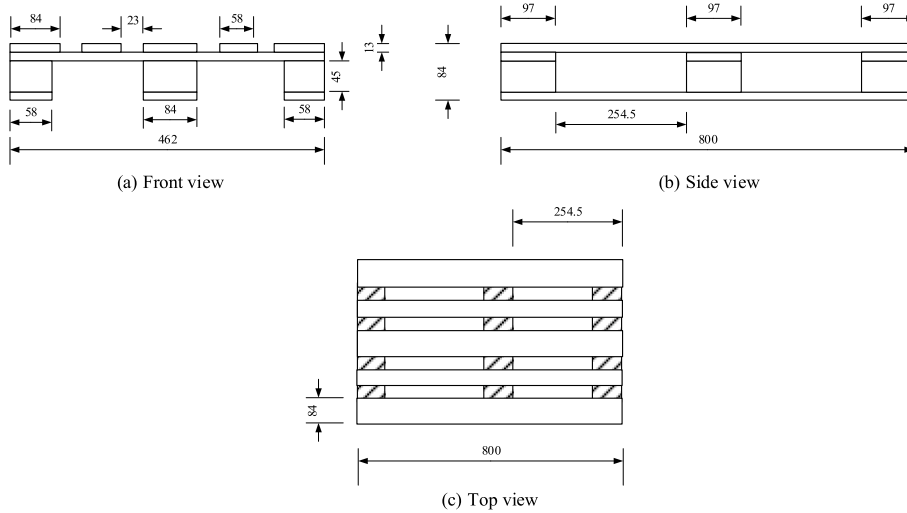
Detailed drawing of the wood pallet [23]. Dimensions are given in mm.
